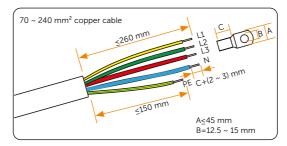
Stripping the AC cable (40 kW ~ 70 kW / 75 kW ~ 125 kW inverter)
